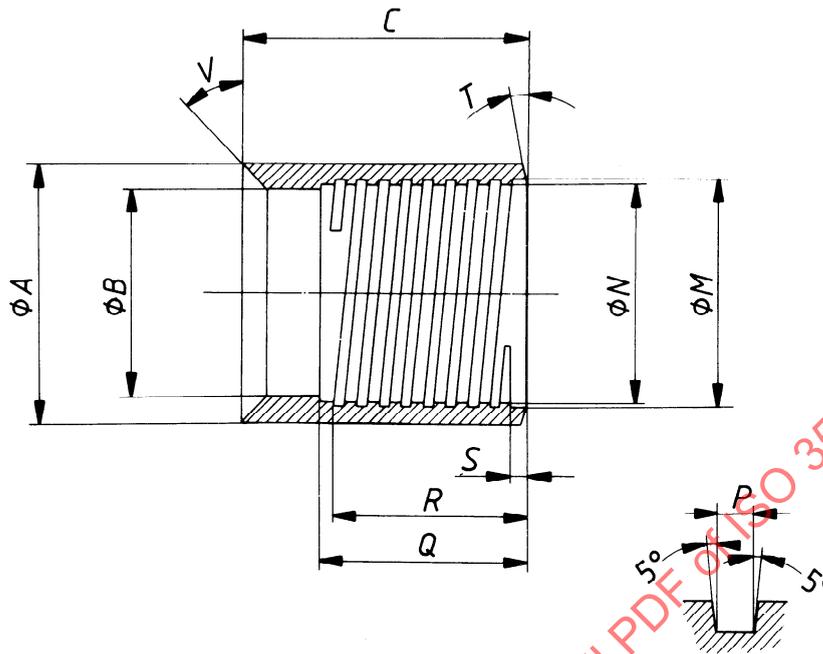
"W" design flush-jointed casing — Casing drive shoe (see table 11)
